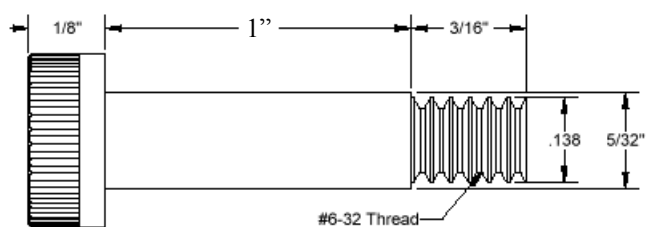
Custom shoulder screws to interface the hydrogel constructs with the tensile mechanical test adapters. Drawing adapted from McMaster-Carr.
